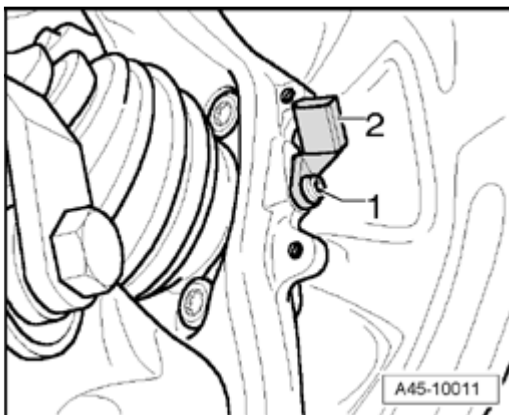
Removing Bolt From Wheel Bearing Housing & ABS Speed Sensor From Wheel Bearing Housing
